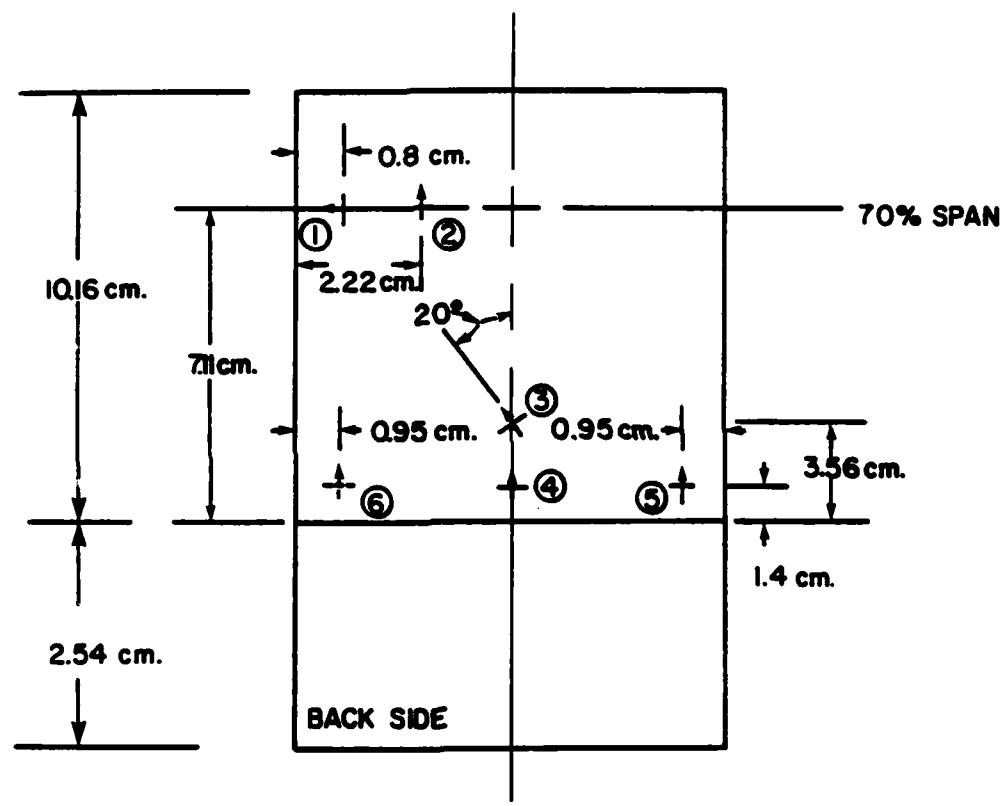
A. Strain Gage Locations for Group 17 Structural Element Test Specimens.
